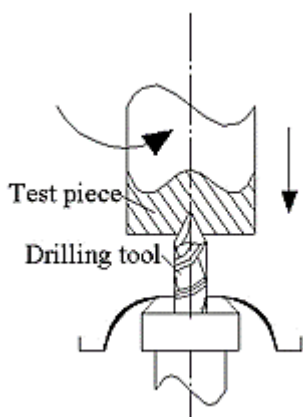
Drilling scheme able to ensure an easy chips removal from the machining zone (after [3])
